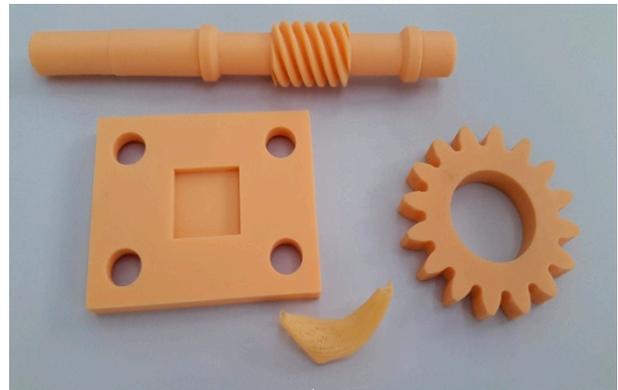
Parts printed with EnvisionTEC ULTRA® 3SP
